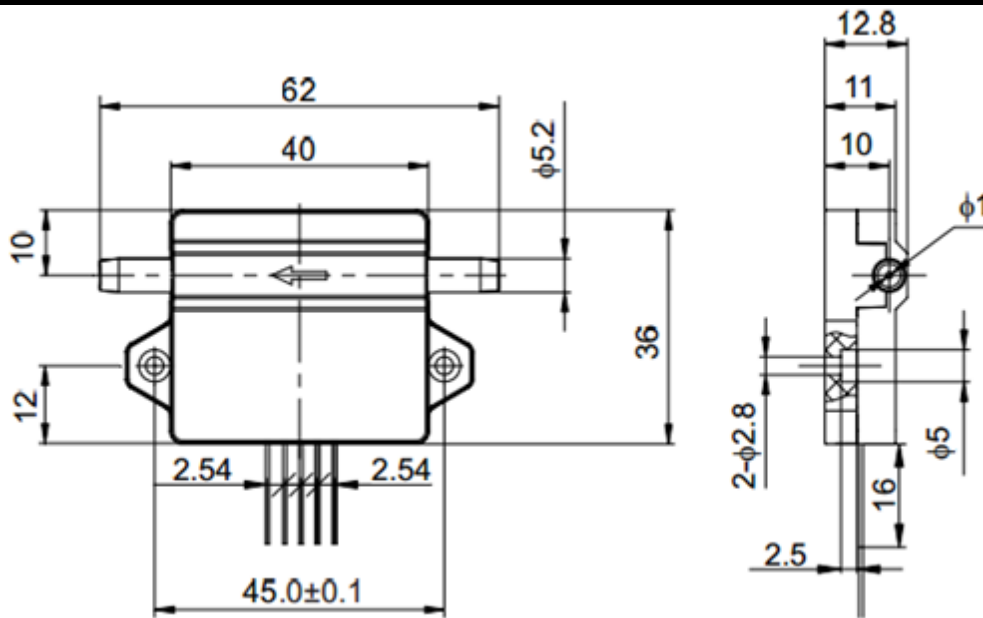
Mechanical dimensions of the ASLF-25 flow sensor.
